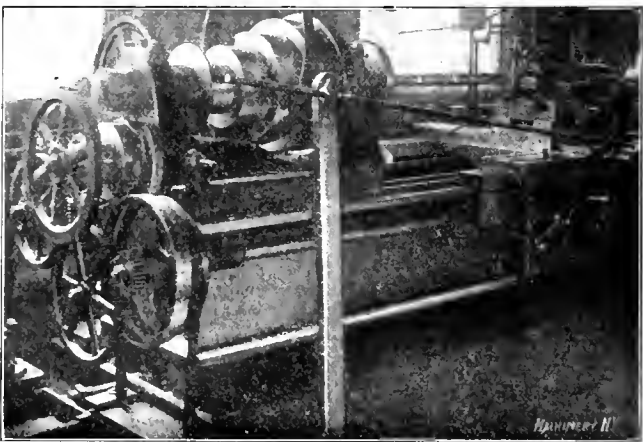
Lathe driven by Pulley on Lead-screw when Cutting Spiral Grooves
